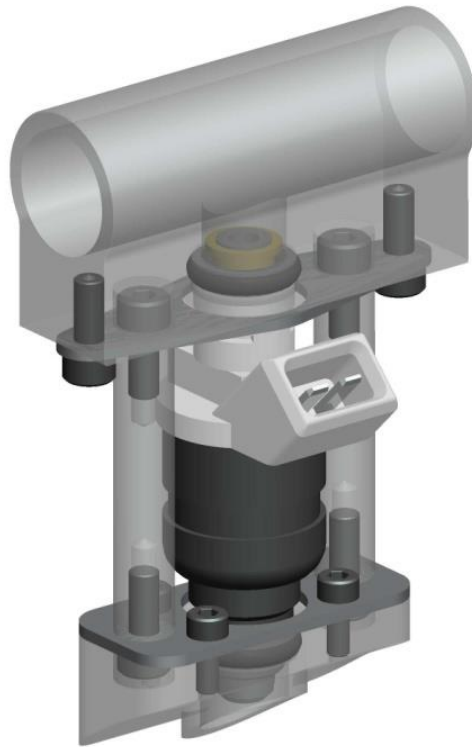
FUEL-INJECTOR AND MOUNTING ASSEMBLY.
